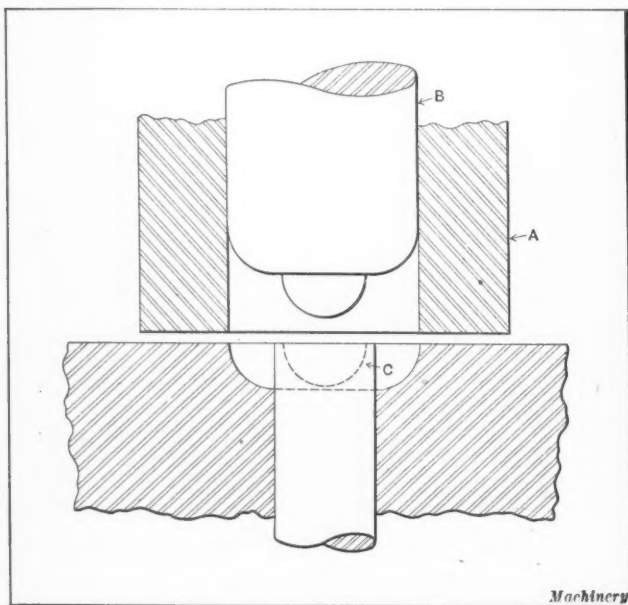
Diagram showing Arrangement of Upper and Lower Dies and Blank-holder
